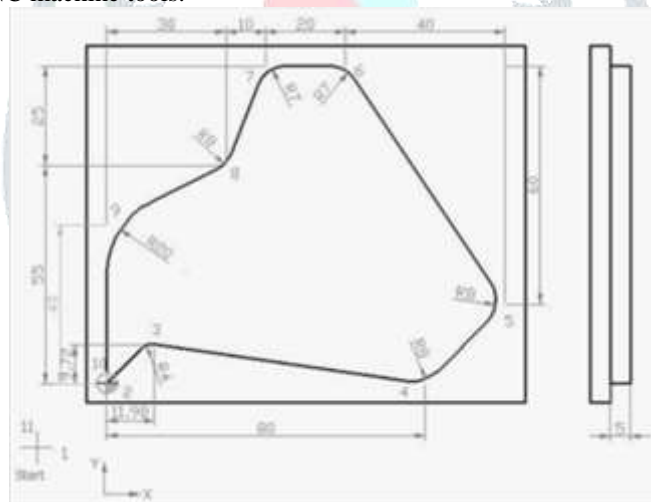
Work piece (2D) to be machined by the operator for energy expenditure measurements
